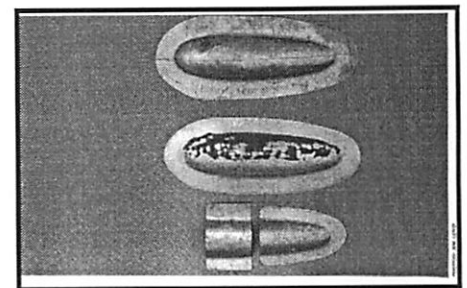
The top bump shows the cracks that develop if the aluminum is not heated often enough or if one spot is hammered too much.
